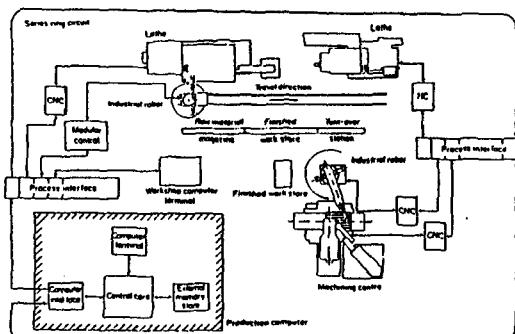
Layout of a flexible manufacturing system for circular workpieces (Machine Tool Laboratory of RWTH-Rhein-Westphalia Technical High School-Aachen)
